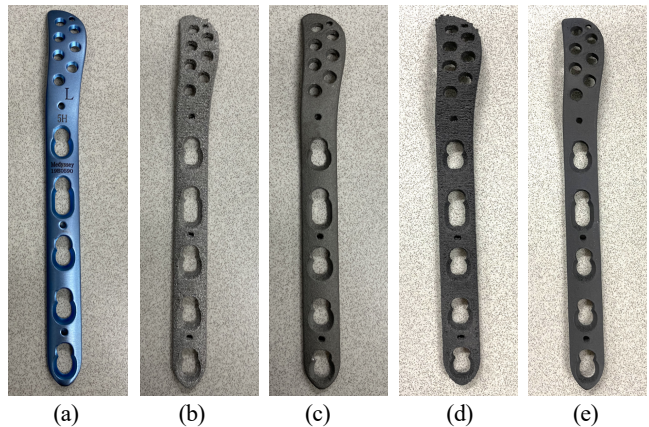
Distal fibula plate (a) commercial sample, (b) EBM machine sample (c) SLM machine sample, (d) EBM machine sample (heat treatment), (e) SLM machine sample (heat treatment)
